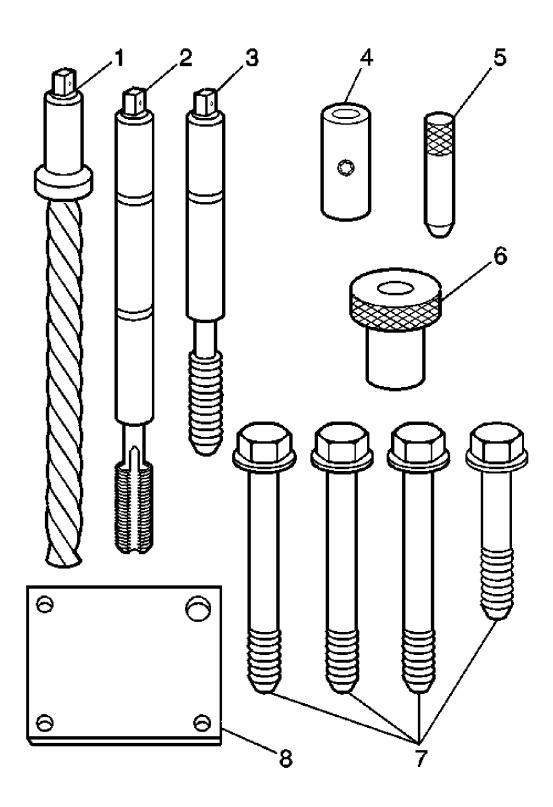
Identifying Thread Repair Kit Components Courtesy of GENERAL MOTORS CORP.
